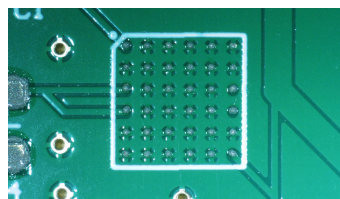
Some footprint of the receiver PCB viewed on microscope after applying the solder paste
